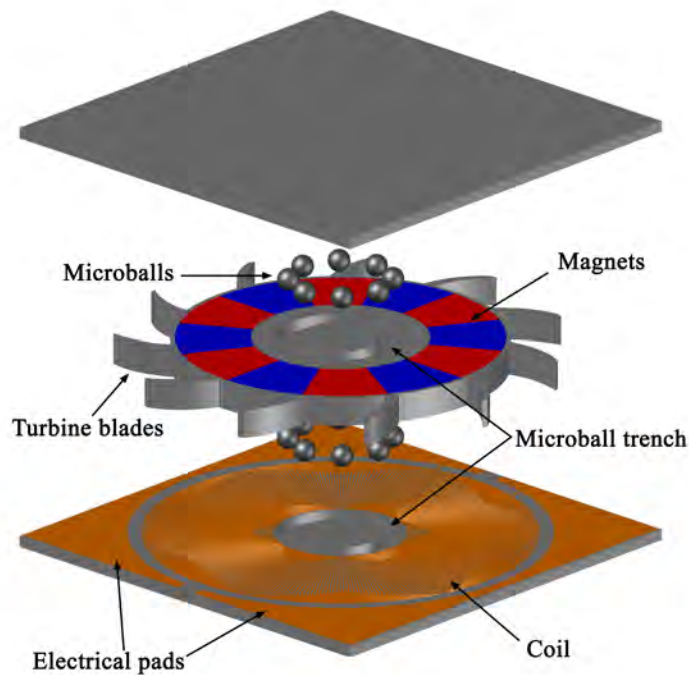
Exploded view of the device containing the stators with micro-fabricated coils, the rotor with embedded ring-shaped magnets, microballs, and microball trenches.
